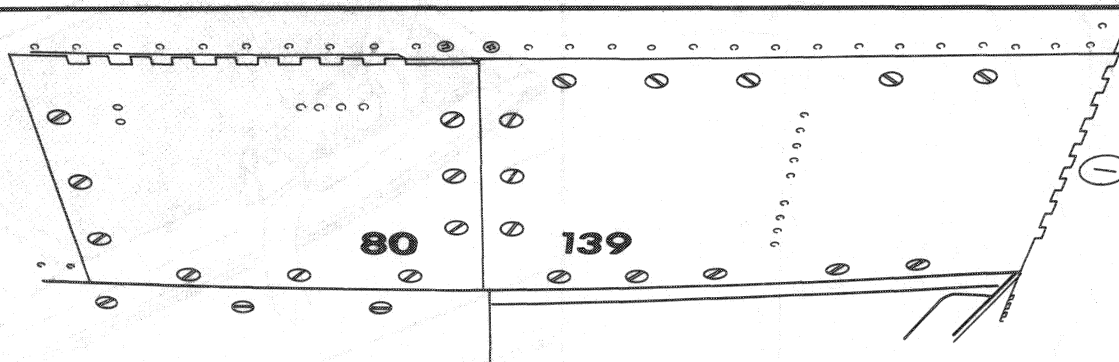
Engine Access Door Opening (Sheet 2 of 7)
